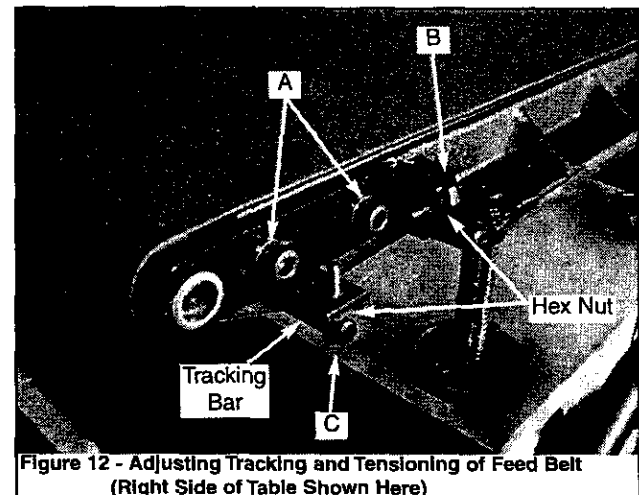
Adjusting Tracking and Tensioning of Feed Belt (Right Side of Table Shown Here)
